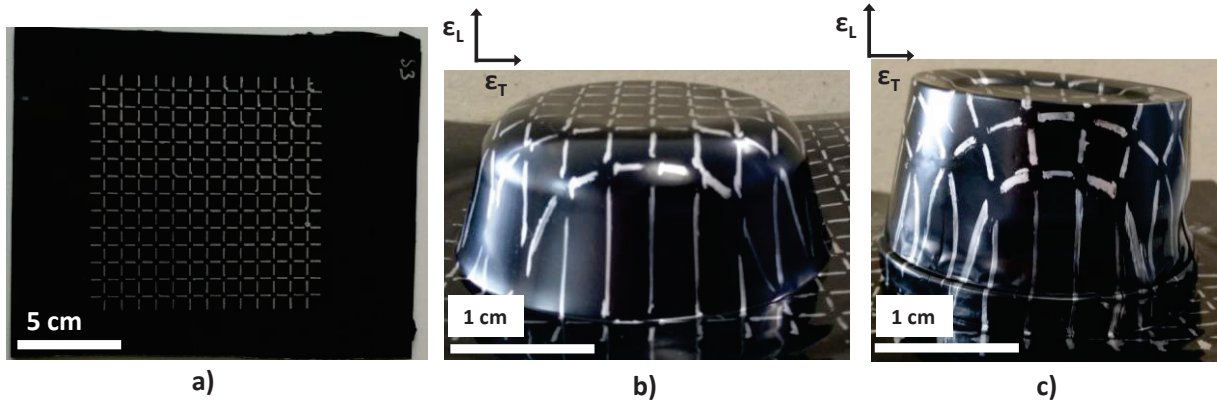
micrographs of a) the compression molded sheet with the pattern, b) the cup deformed by the plug and c) the cup after a plug and vacuum-assisted thermoforming.
